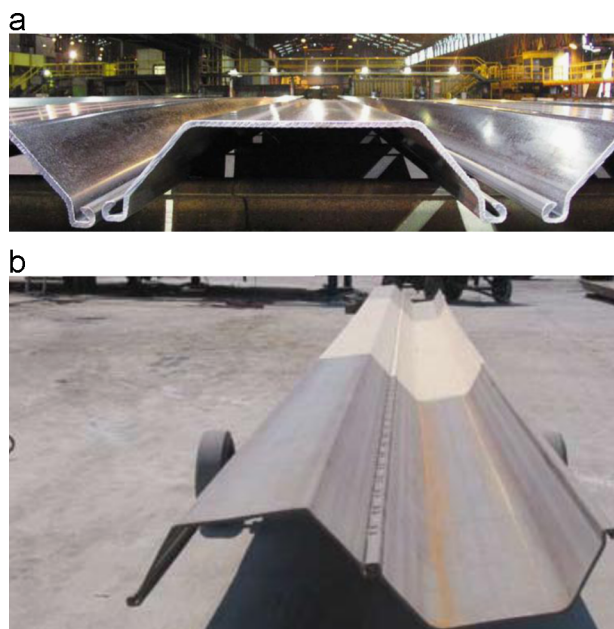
Rolled U-profile pile. (a) Single. (b) Double, crimped.
